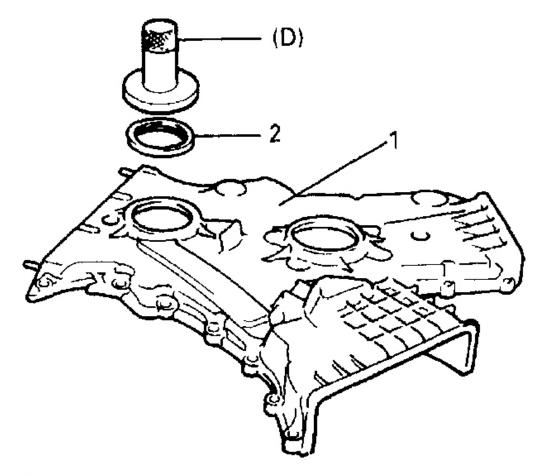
Installing New Oil Seal Courtesy of SUZUKI OF AMERICA CORP.
